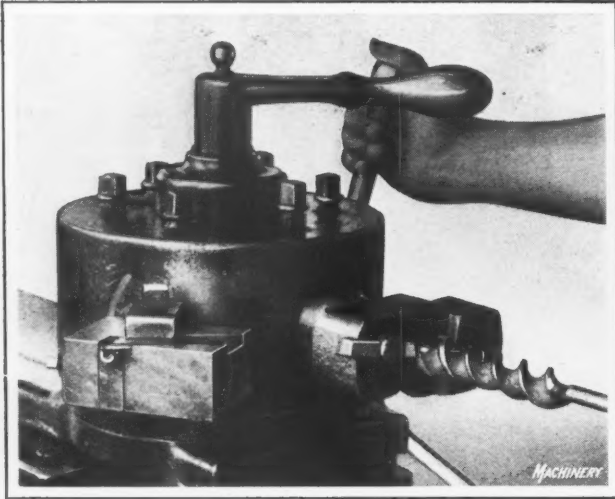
Tools employed to turn the Tapered Point and the Head to Size
